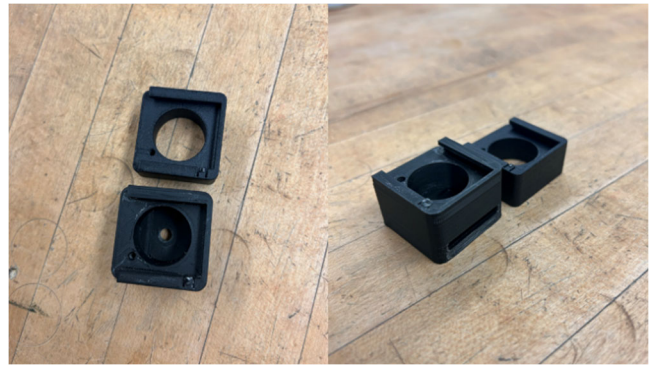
Custom 3d printed boot shown on the left and default manufacturer designed boot shown on the right.
